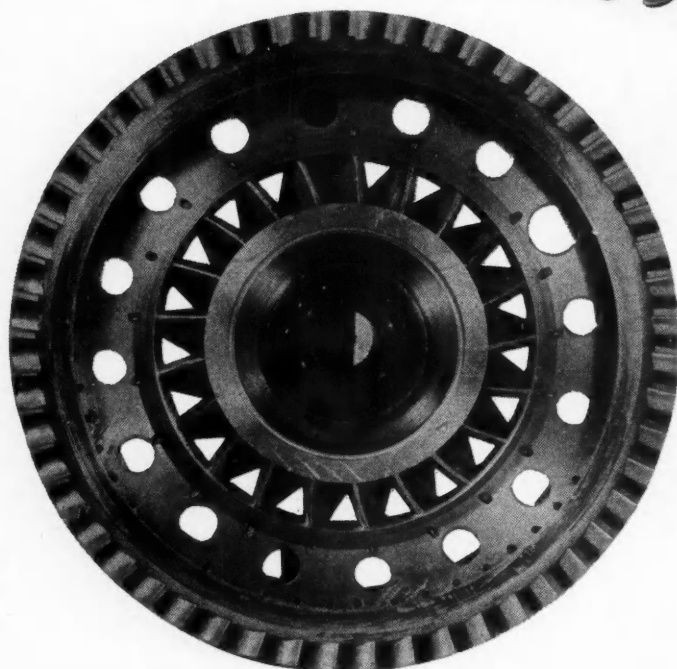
(Right), Rotor or driven member of hydraulic unit, side view
